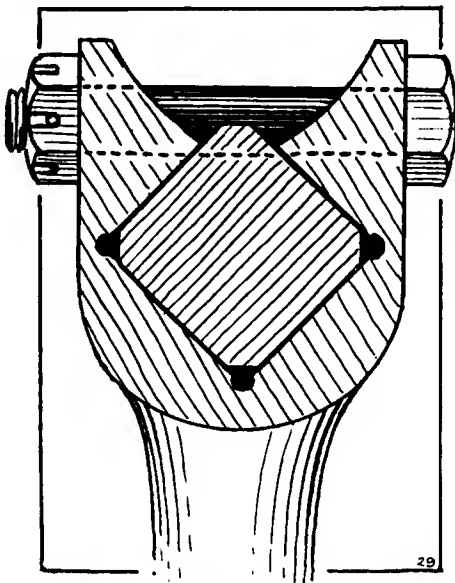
Conventional form of square shaft, illustrating means of clamping crank securely.
